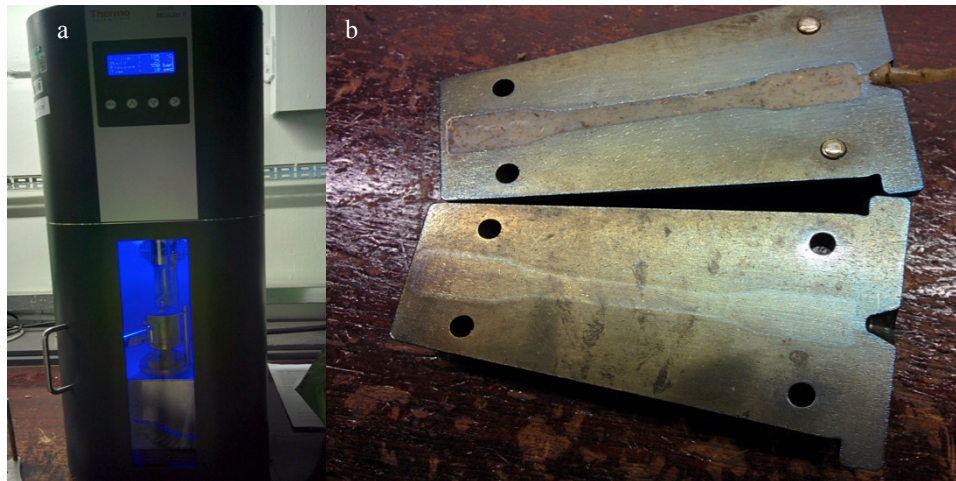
a) Haake Minijet II injection moulder and b) dog bone shaped mould.
